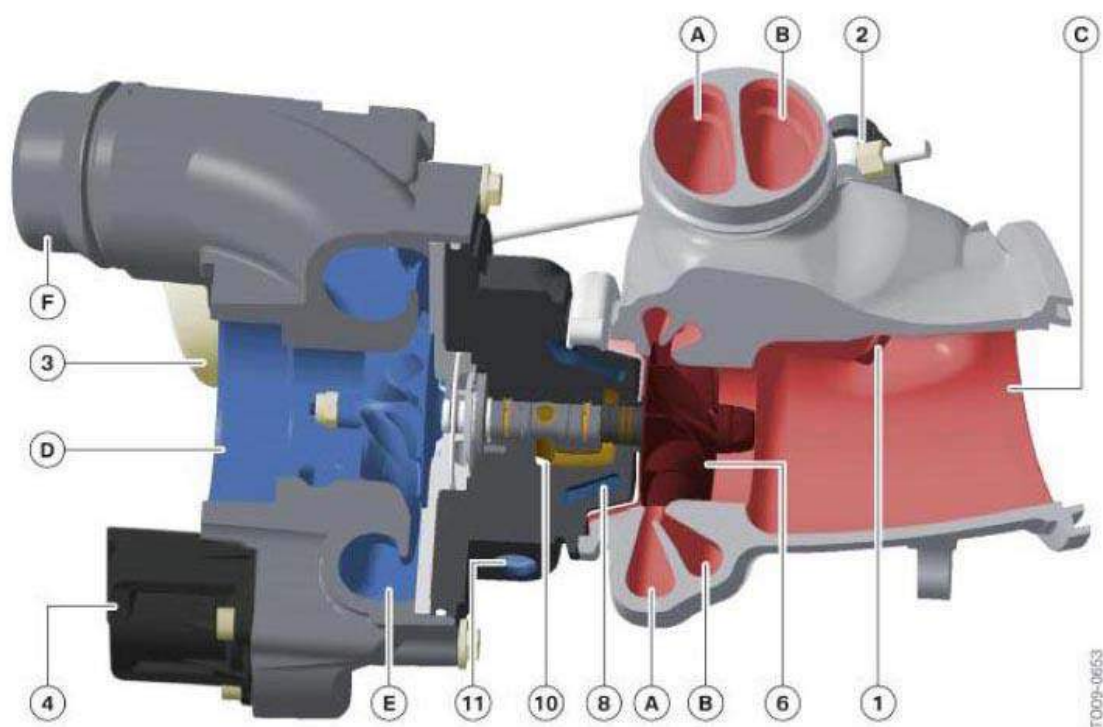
Identifying Twin Scroll Turbocharger Components Rear View
